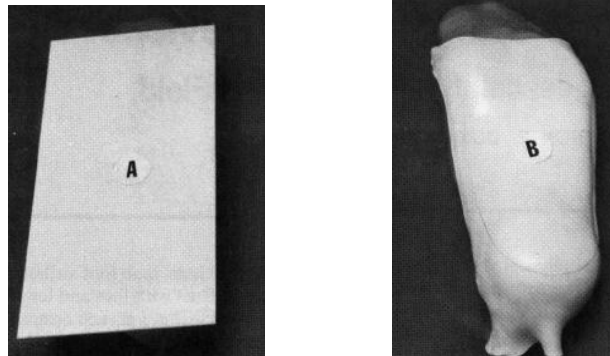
33 Thermoplastic piece (a) and (b) heated sheet draped over positive mould (Doxey, 1995)
